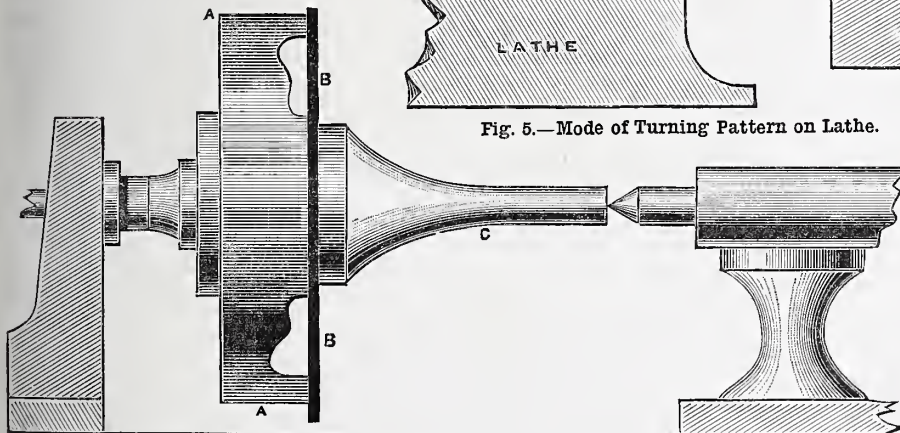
Sketch showing Pattern (A), Sheet Metal (B), and Holder (C) in Position on Lathe.
